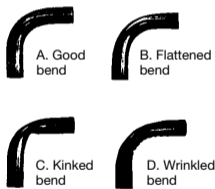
Figure B shows a flattened bend, caused by trying to bend too short a radius, or bending smaller diameter tube in larger radius block.
